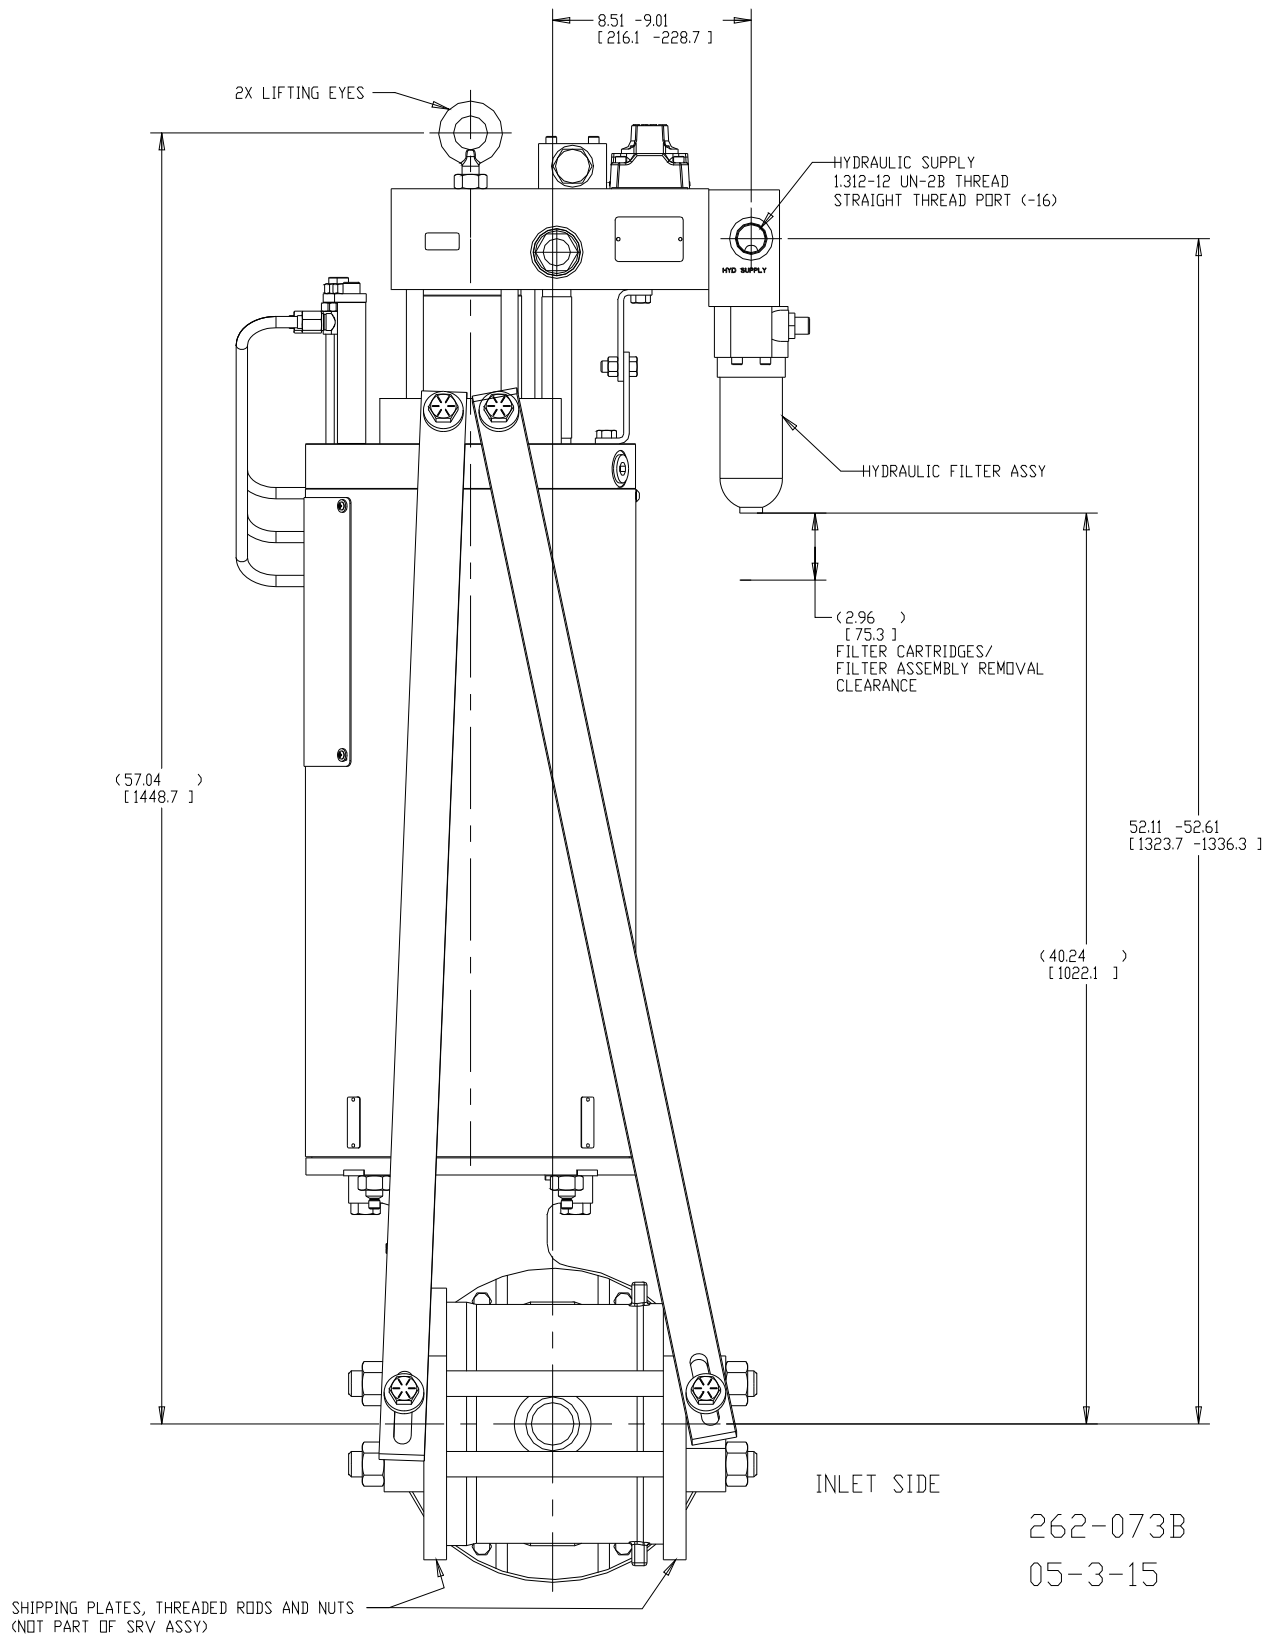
8-inch SS-260 Gas Stop/Ratio Valve Outline Drawing
